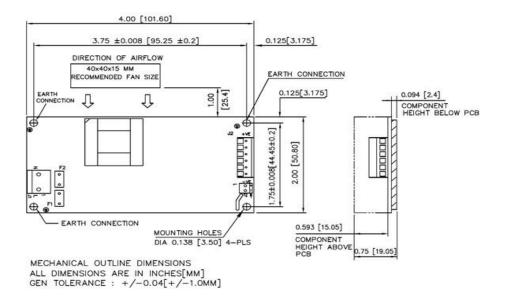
Mechanical Drawing - Option 1 (Output Connector - Screw Terminal)
